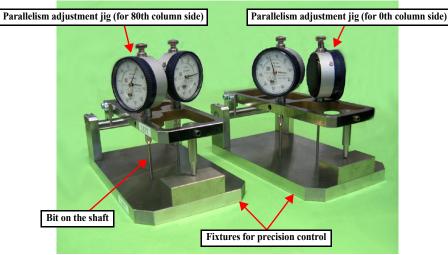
Parallelism adjustment jig/Fixtures for precision control
